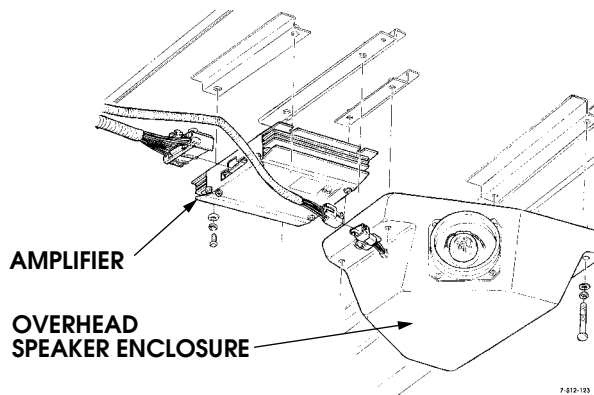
Overhead Speaker & Amplifier Removal.
